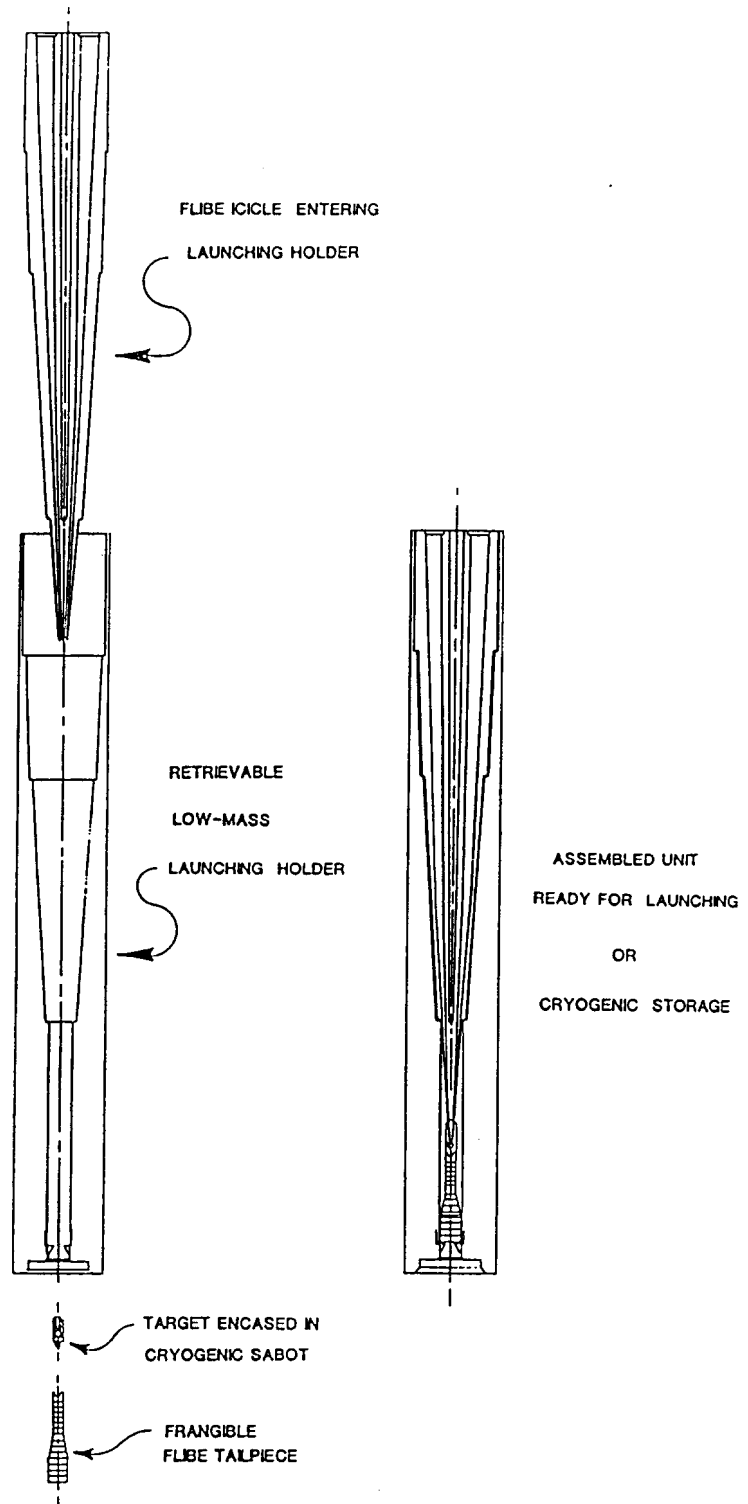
The coaxial frozen salt guide section and target encased in its cryogenic sabot are shown being assembled in the assembly unit.
